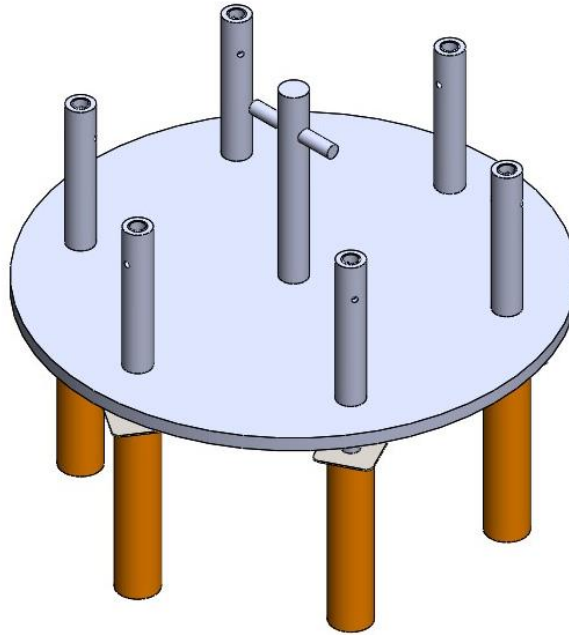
Initial sprue bar rack design with six sprue bars attached.
